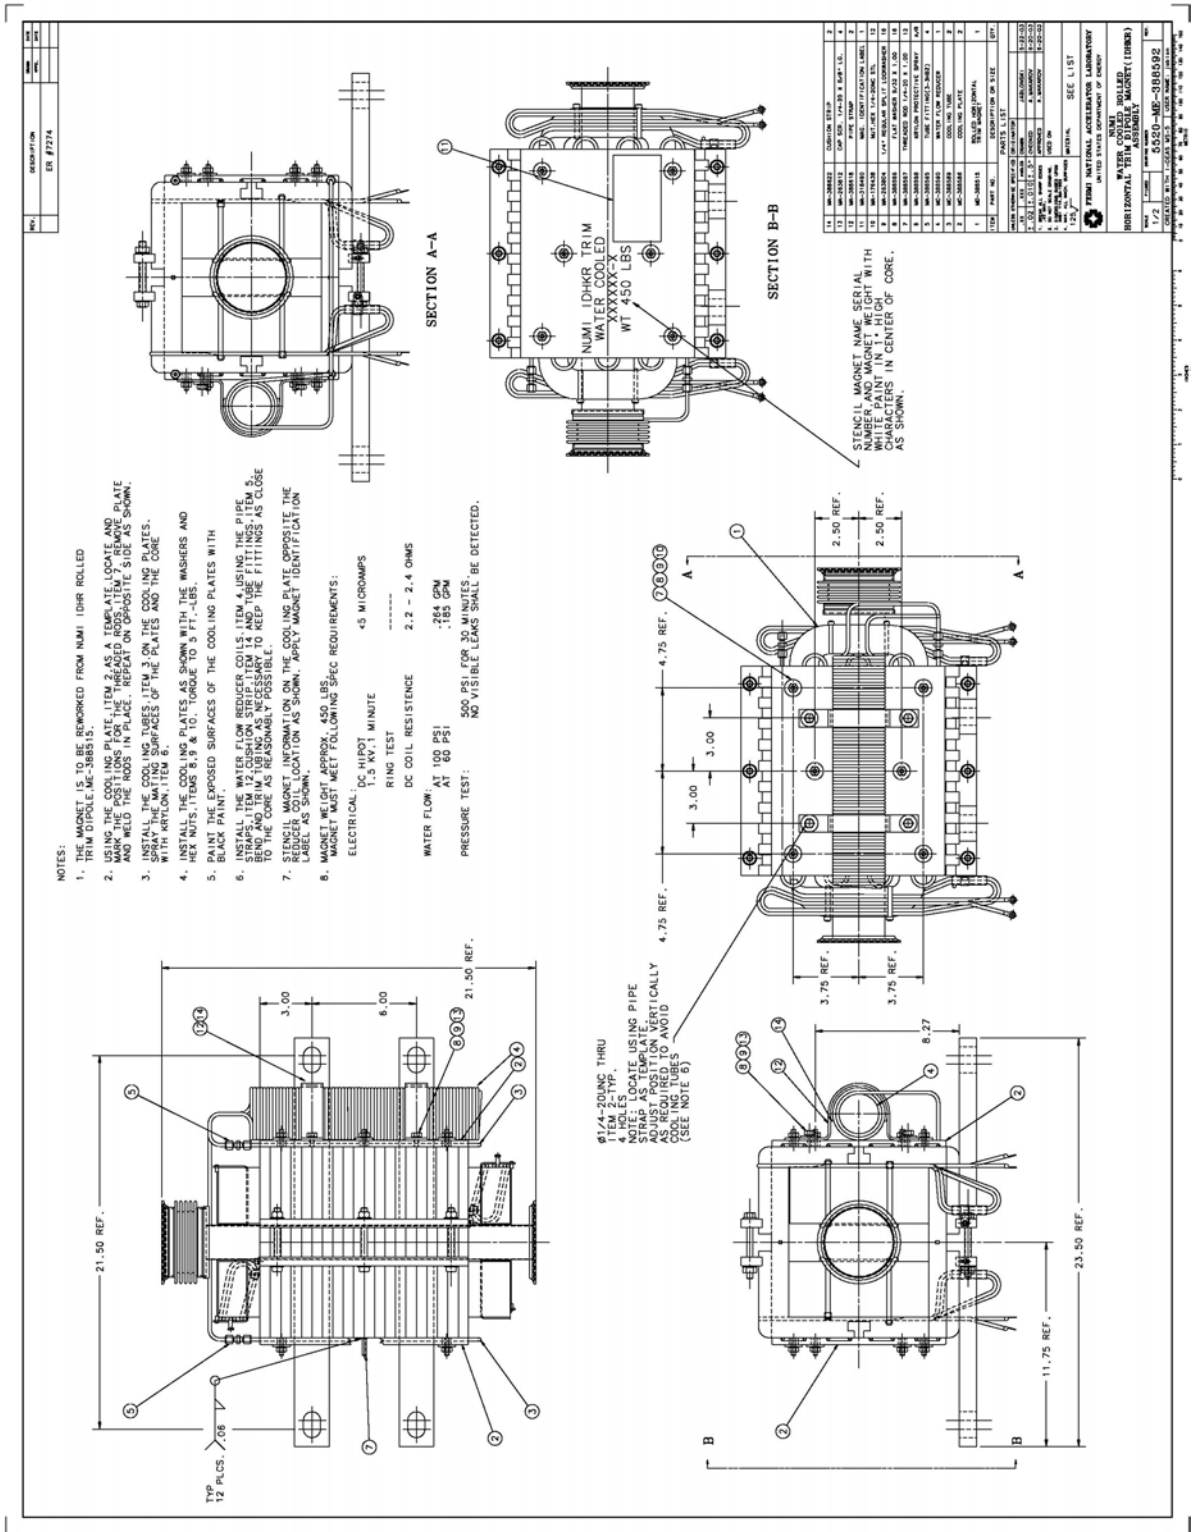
Water Cooled Horizontal Trim Dipole Magnet (IDHKR) (Drawing 5520-ME-388592)
